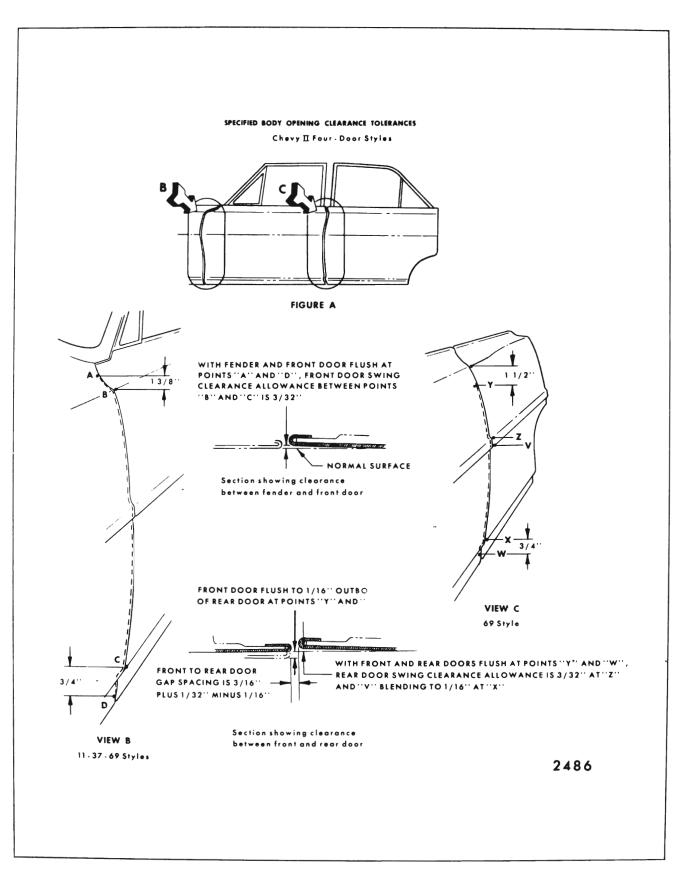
Specified Body Opening Clearance Tolerances - Chevy II 4-Door Styles
